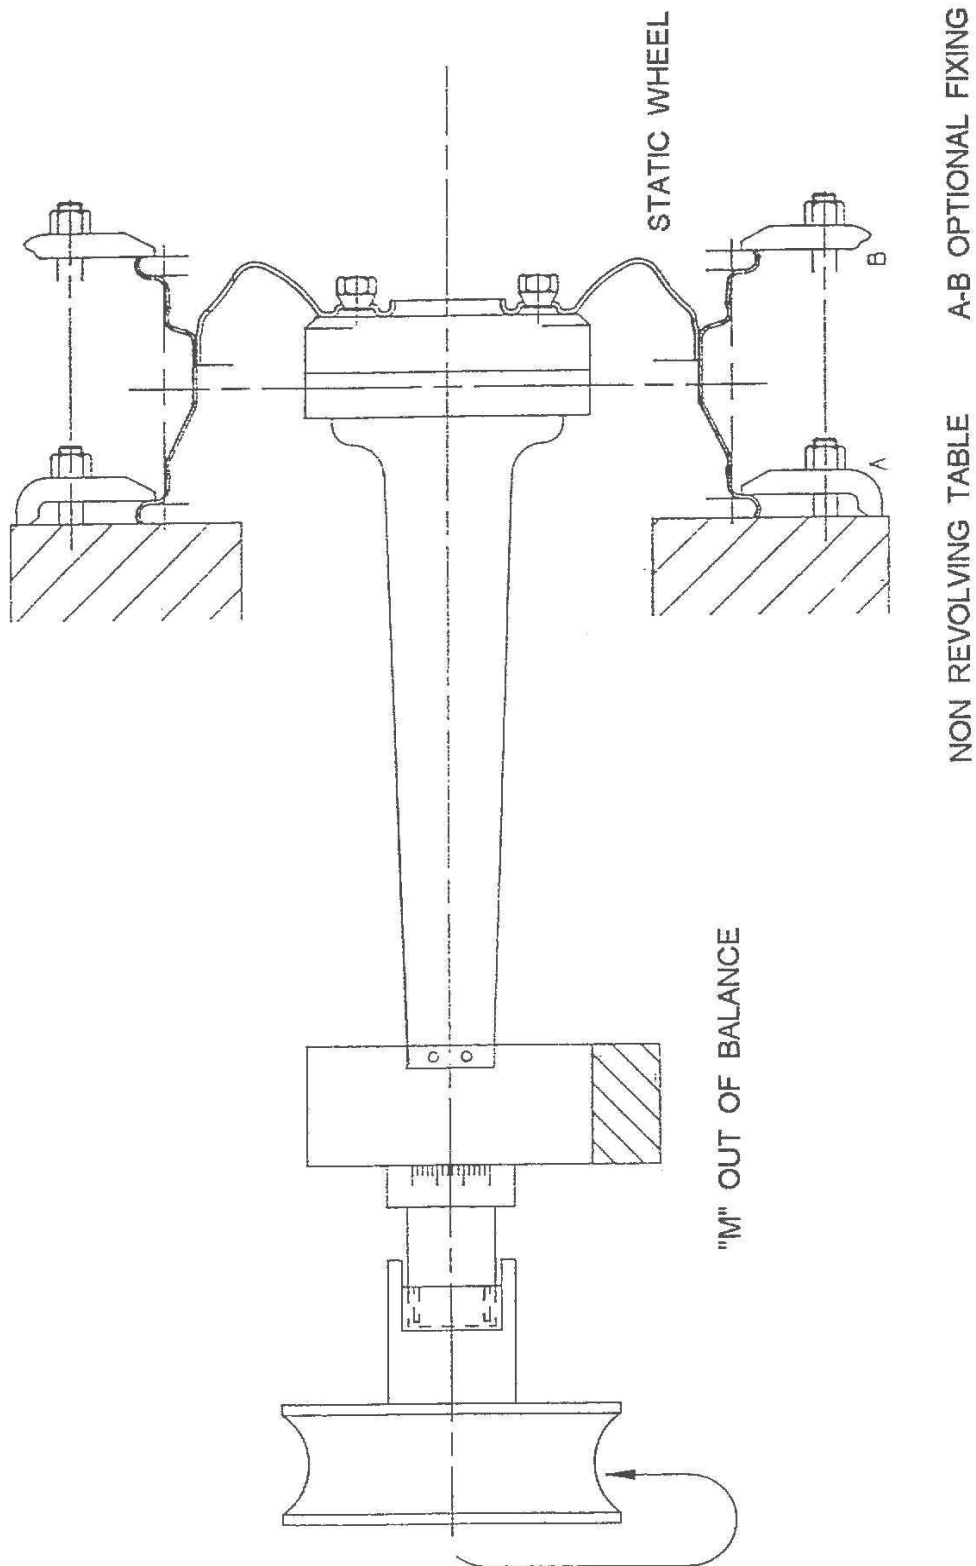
UNBALANCE TYPE DISC BENDING MACHINE
